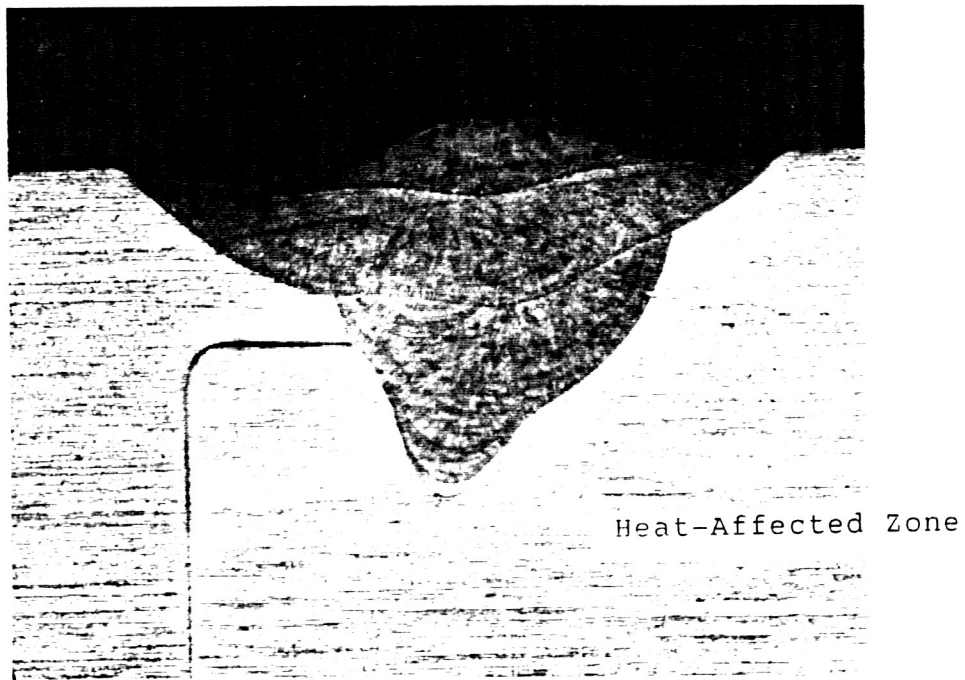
CLOSURE CROSS-SECTION OF WELD SAMPLE FOR S/N 5,
